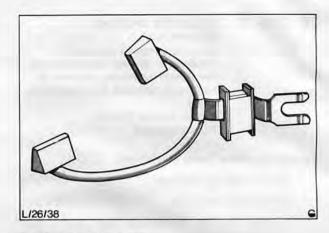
Terminal brushes NOTE: Long and Short braiding
